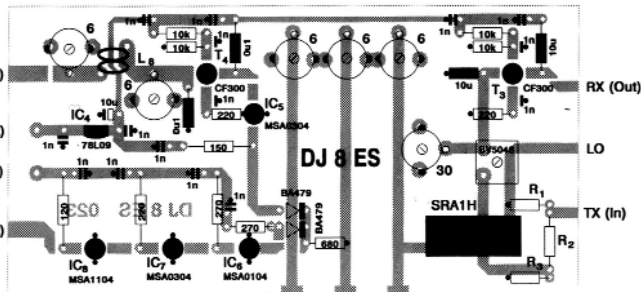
Component layout for the 70cm transverter showing the component side of the PCB
